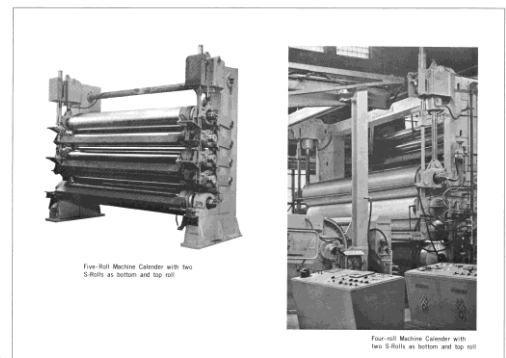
Five-Roll Machine Calendar with two 6-Rolls as bottom and top roll
